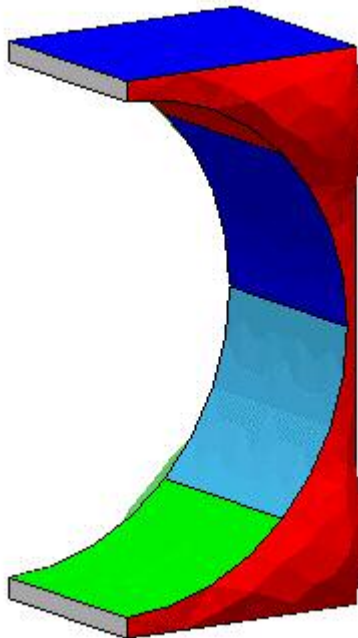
Solder shape in fiber-groove interface with a nominal solder volume
